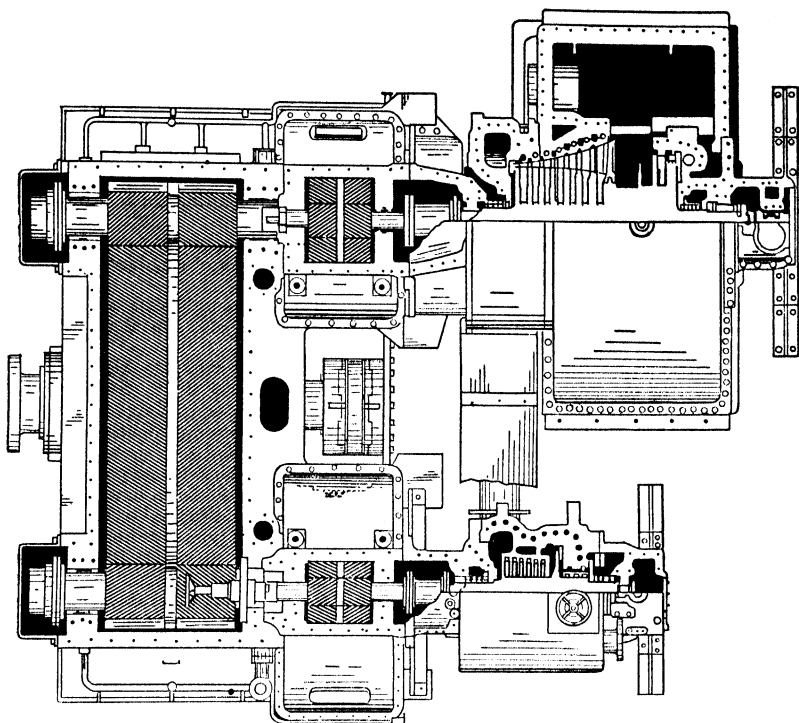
Cross-compound geared (speed-reducing) steam turbine unit for ship propulsion. Unit is typical C3 design, see Table I. (Courtesy of General Electric Co.)
